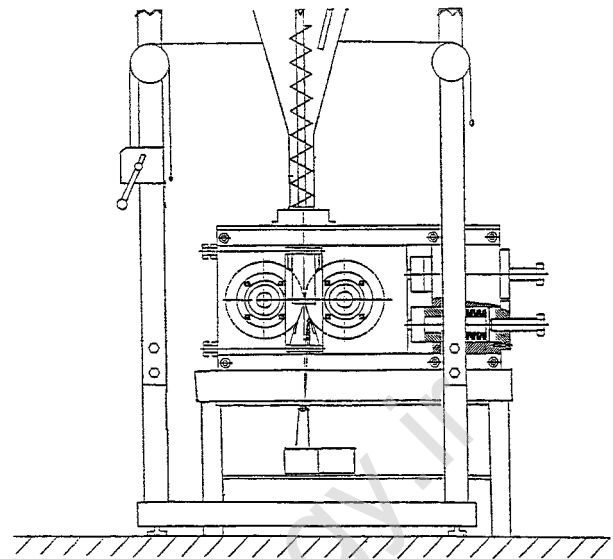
Sketch of the high-pressure roller mill with screw feeder.
